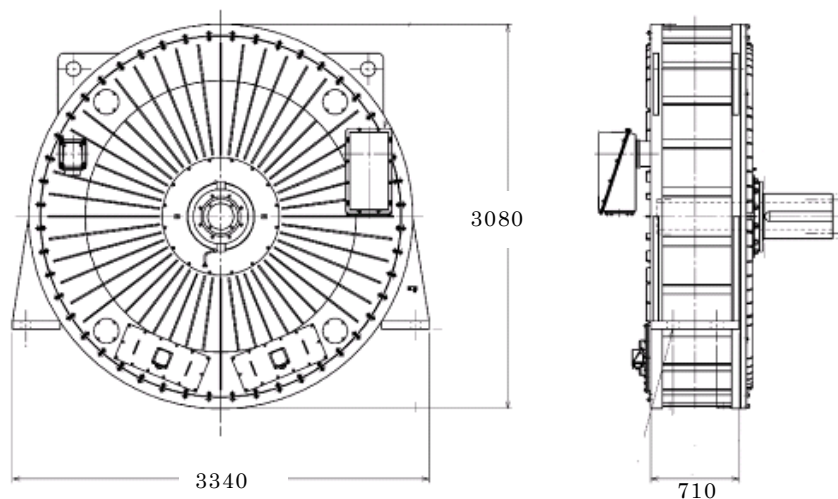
Drawings of demonstrated equipment (Dry weight: 17.5[t])
